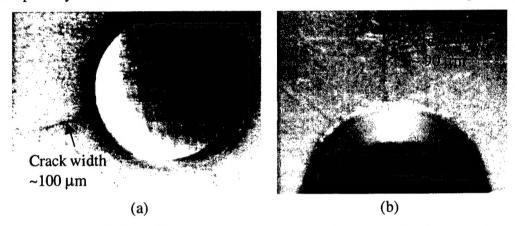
Mid-IR CCD images at 3 μ m – 5 μ m for (a) Sandia demo crack sample consisting of a rivet and a rivet-hole-induced crack underneath ~100 μ m-thick standard aircraft paint layer; and (b) a CCNY-LM crack sample consisting of a rivet-hole and rivet-hole-induced cracks covered by a typical military paint system #5 (strontium chromate epoxy low IR reflective primer covered by polyurethane topcoat paint) with a thickness of ~120 μ m.
